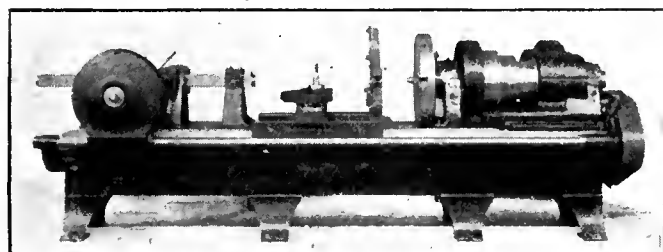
REAR VIEW OF 26-IN. DOUBLE BACK-GEARED ENGINE LATHE FOR BORING HIGH EXPLOSIVE SHELLS.
